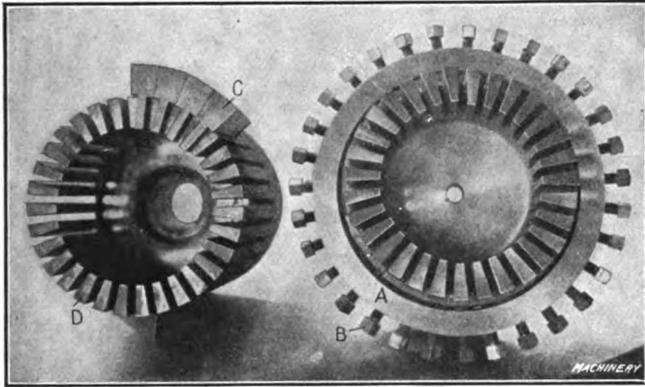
Special Chucks for holding Die and Punch Sections while Grinding
